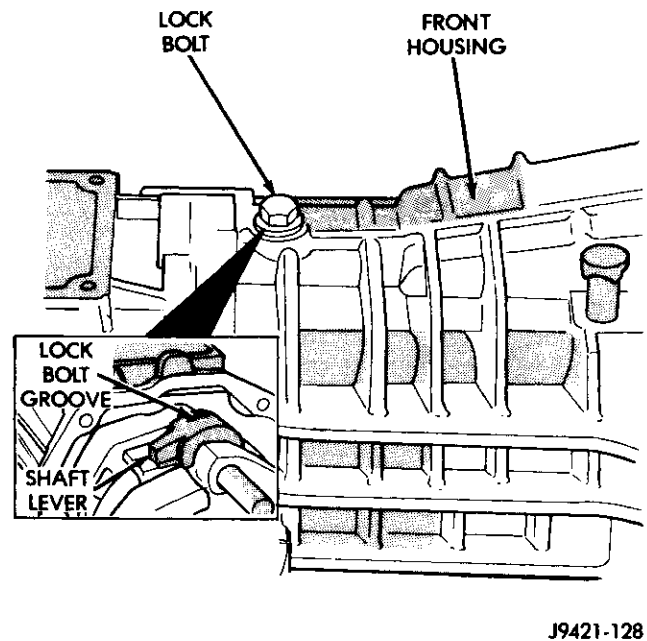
Correct Alignment Of Lock Bolt And Shaft Bushing
